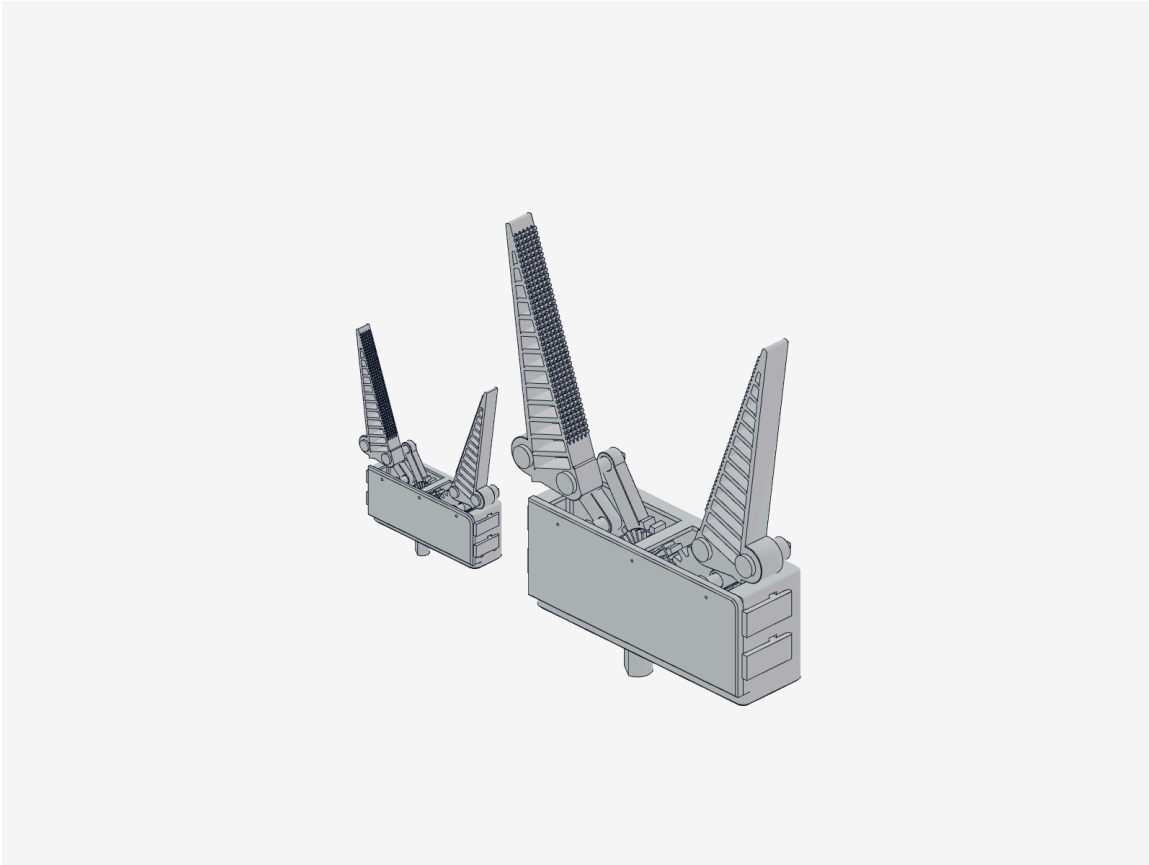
The shipped 1× gripper beside the 2.0× self-similar build, both in the open pose. Every linear dimension, including linkage, gears, finger walls, and enclosure, scales by the same factor, so the geometry, the gear timing, and the wrap behaviour are preserved while the jaw opening grows from 124 mm to 248 mm at the fingertips.
